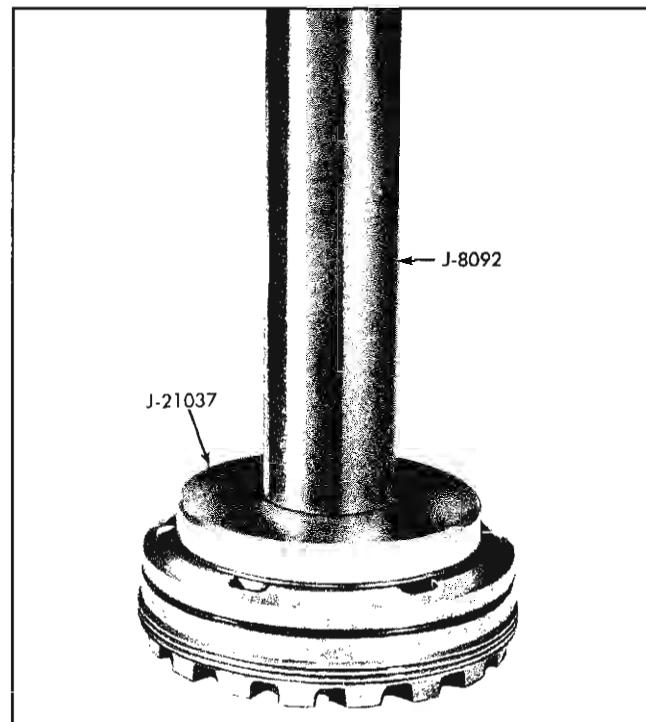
Tool Positioned to Install Front Pinion Bearing Outer Race
